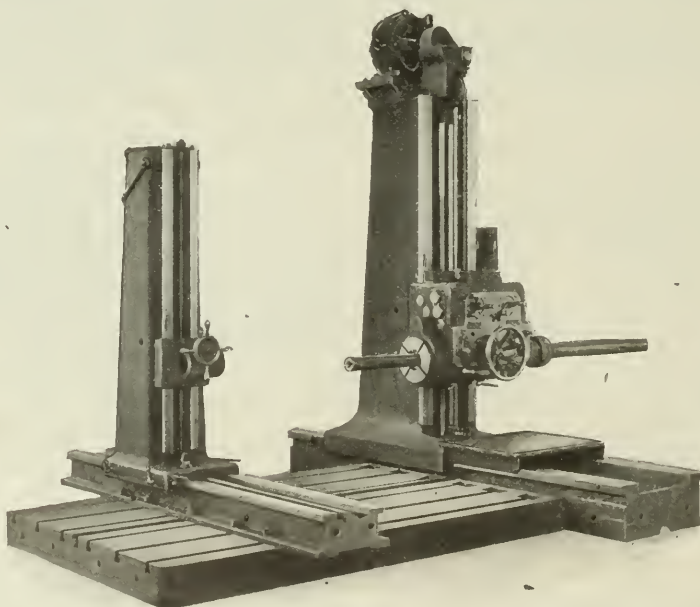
Landis Floor Type of Horizontal Boring, Milling and Drilling Machine
